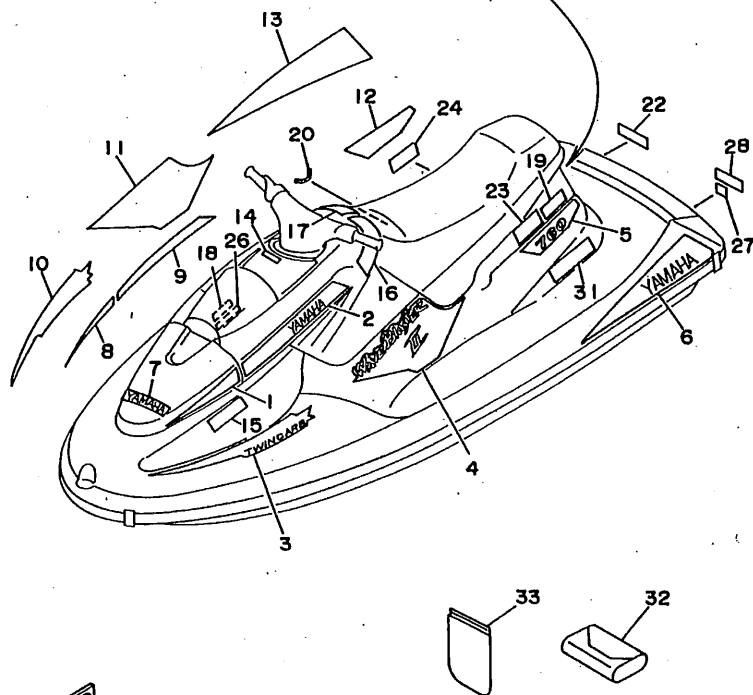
GRAPHIC 2. TOOL (FOR CAN, GUM, AUS, FRA)
